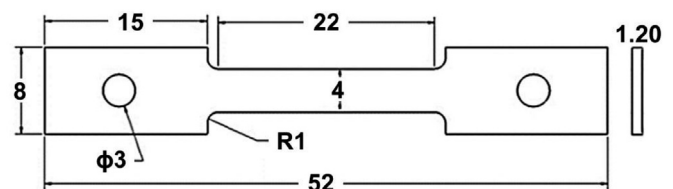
Tensile test specimen geometry; all dimensions are in mm.
